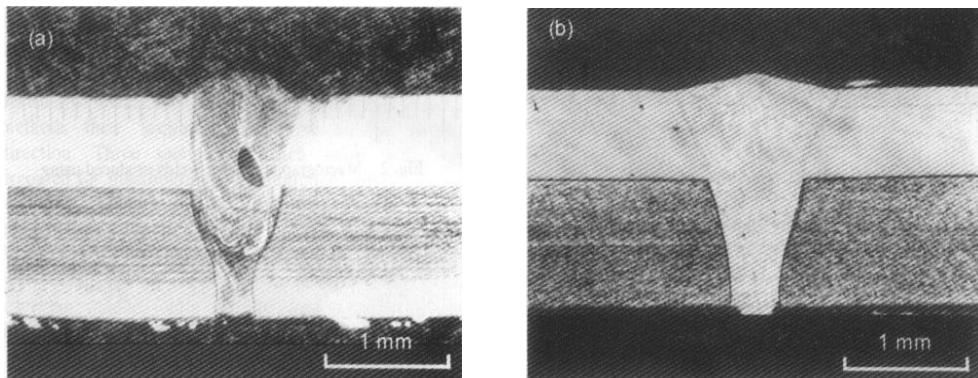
Typical examples of cross sections taken from laser lap welds produced using 15 l/min helium and different gap distances. (a) Gap: 0.0mm, (b) Gap: 0.025mm.
